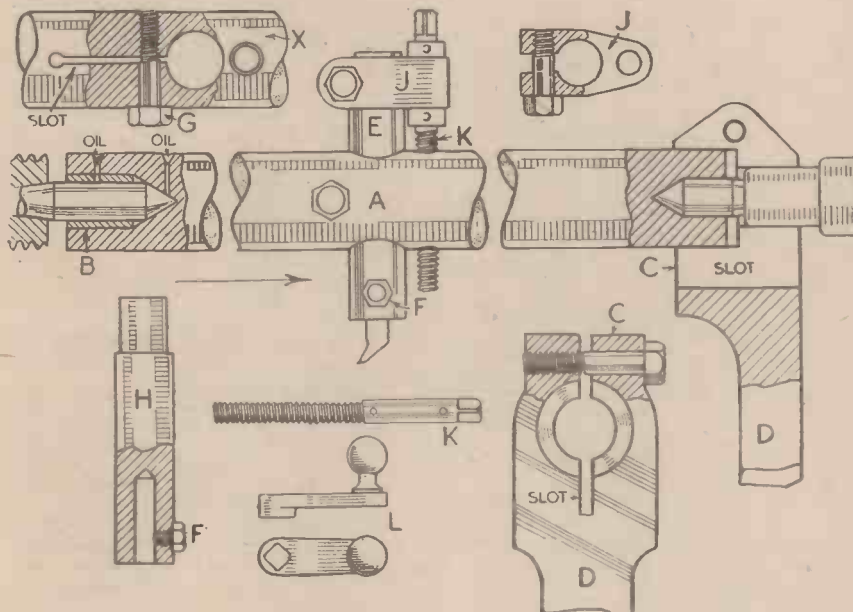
Constructional details of the rig for planing surfaces in the lathe.
